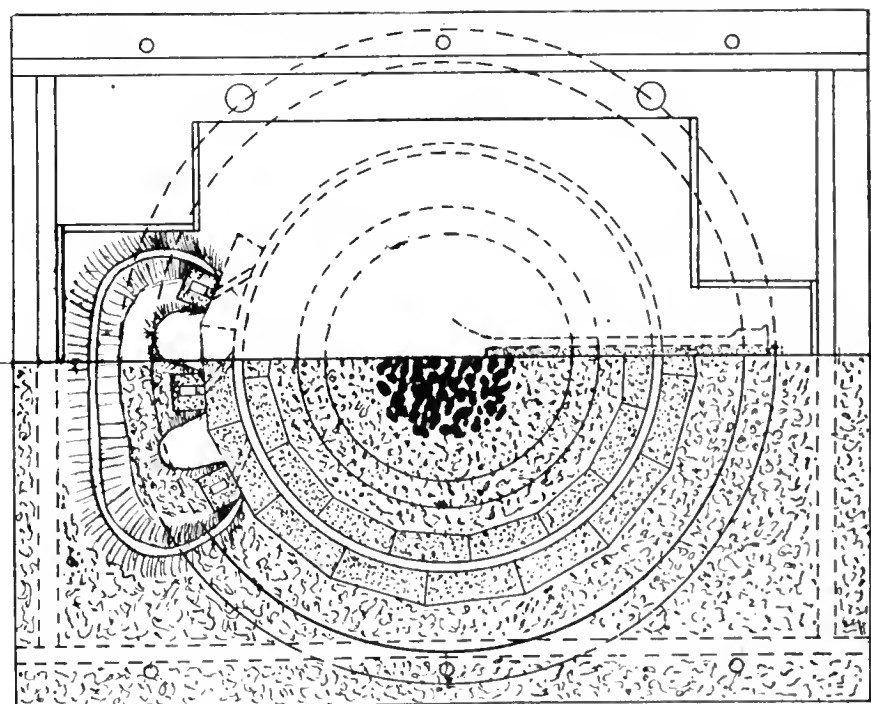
HALF SECTIONAL PLAN OF MOULD.
